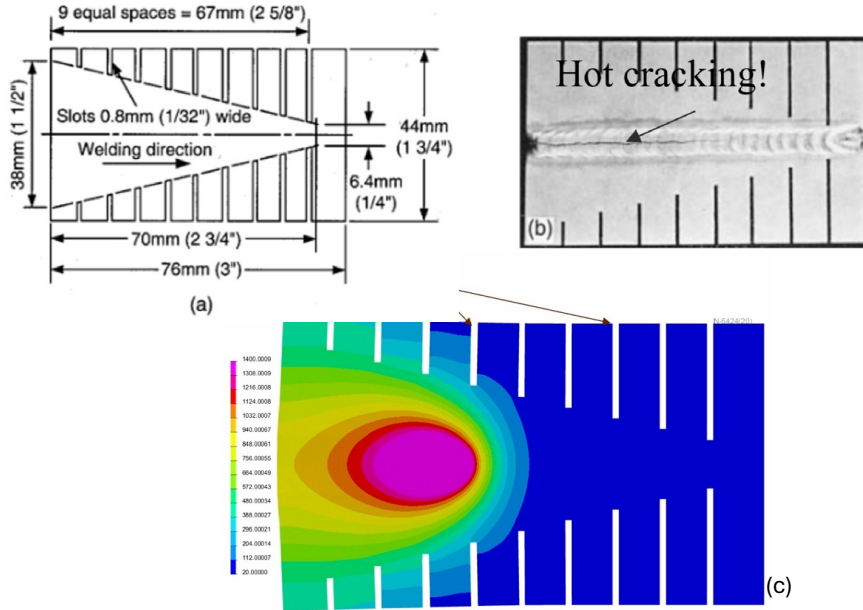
(a) Schematic of Houldcroft “Fishbone” Test [2]. (b) Hot Cracking during Test [2]. (c) Welding Simulation of Houldcroft Test [7] using SYSWELD [9].
